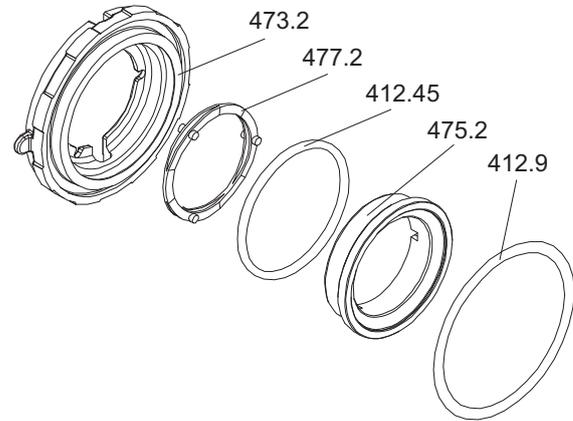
Dismounting the ALFA-KSS-RS/D mechanical seal
